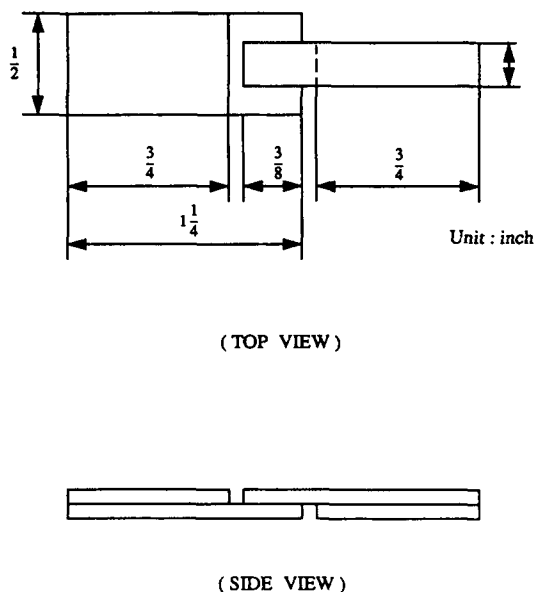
Form and dimensions of the modified single lap-shear joint specimen.
